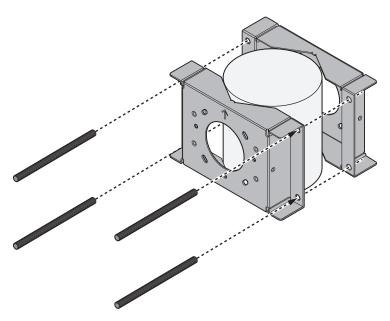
Inserting Mounting Bolts Through the Pole Clamps
